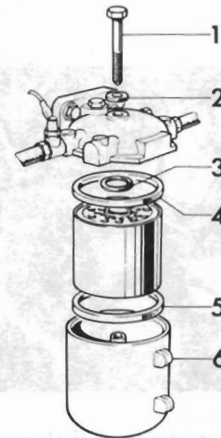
Exploded view of main fuel filter (Sec 23)
